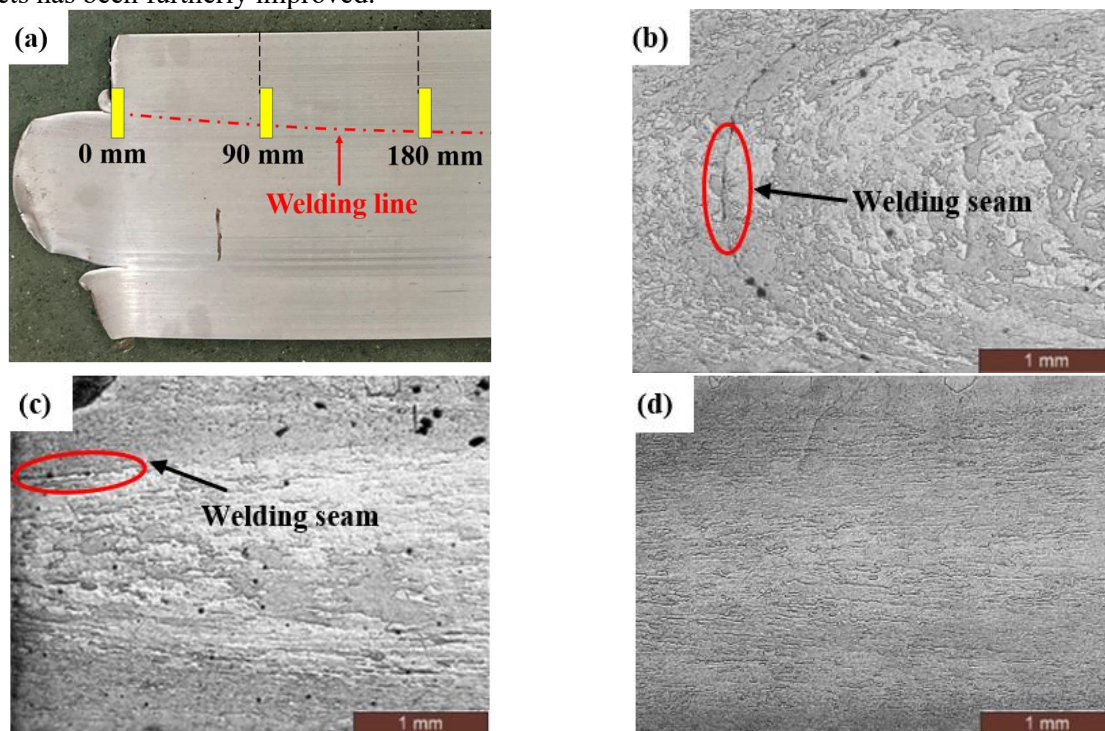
Micrographs at different sampling positions, showing (a) the welding seams formed between billets gradually disappearing from the front end 0 mm (b) to 90 mm (c) to 180mm (d) of AA1060 extruded under 450°C, 0.5 mm/s.
